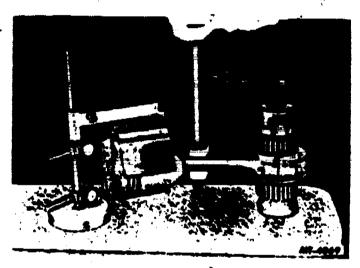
Checking Alignment of Piston and Connecting Rod Assembly Using SE-1099 Connecting Rod Aligner
